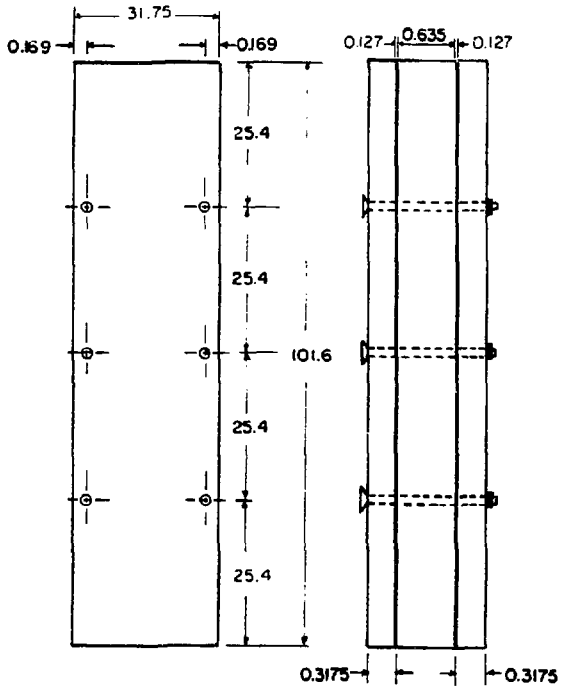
Specimens used to test solder joint in fatigue. a) Isothermal fatigue specimen. b) Thermal fatigue.
